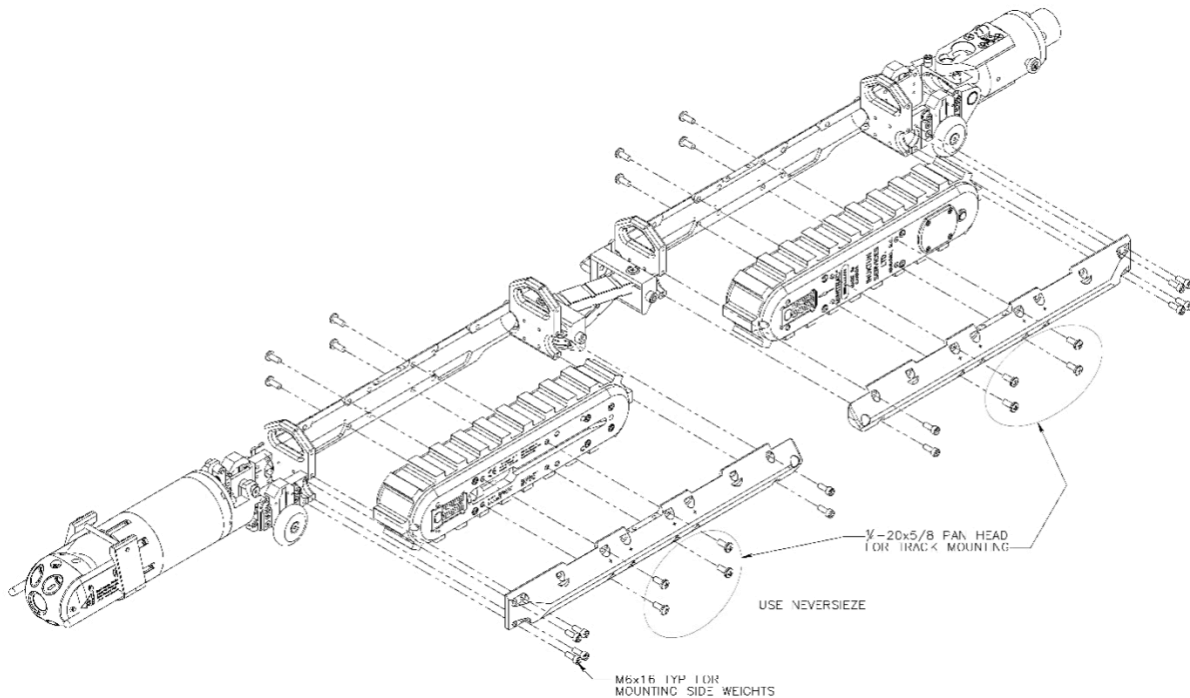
INLINE TRACK MOUNTING SCREWS
